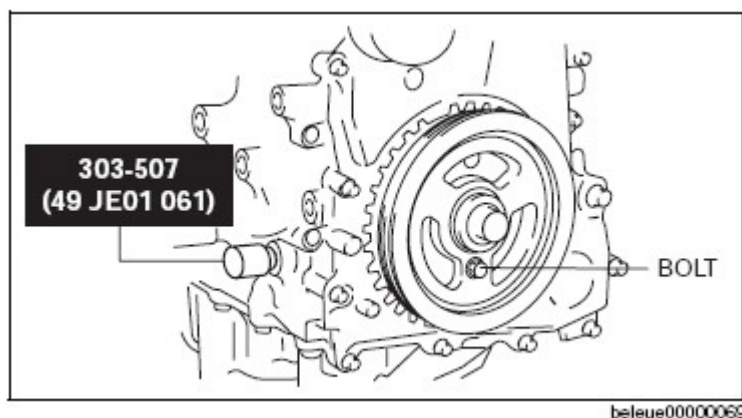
Identifying SST (303-507) And Bolt (M6 X 1.0)
